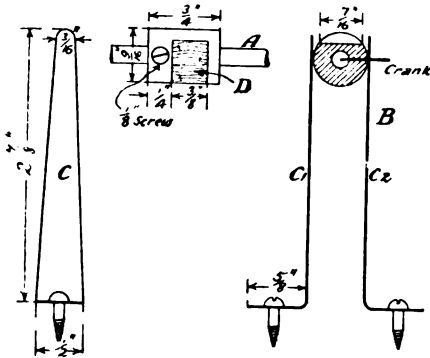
SHOWING BRUSHES AND CONTACT SLEEVE.
